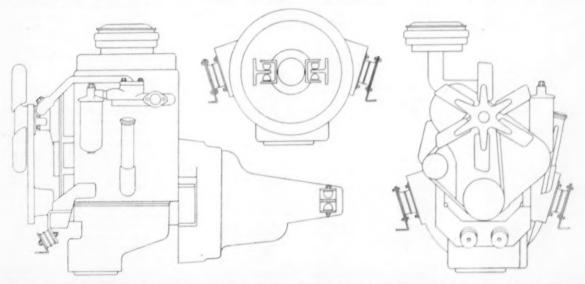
The Perkins P3 engine mounting arrangement, showing how rubber snubbers are applied at the tail end of the gearbox extension
